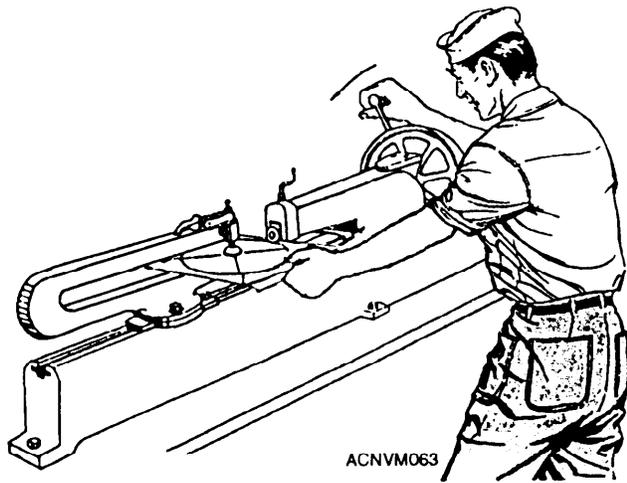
Cutting a disk with the ring-and-circle shear.
